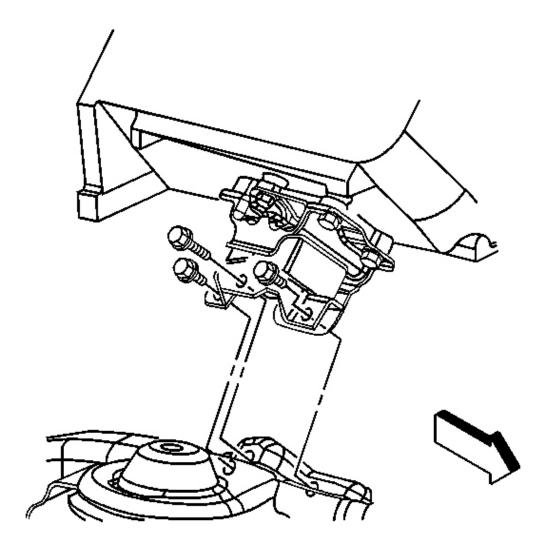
Engine Mount To Engine Mount Bracket & Bolts
